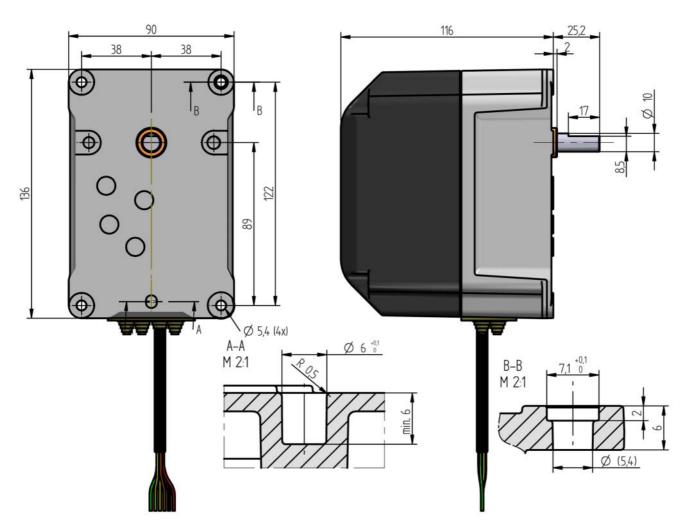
Dimensional drawing of motor type 0R5001-1 and type 662R5003-1 with cable
